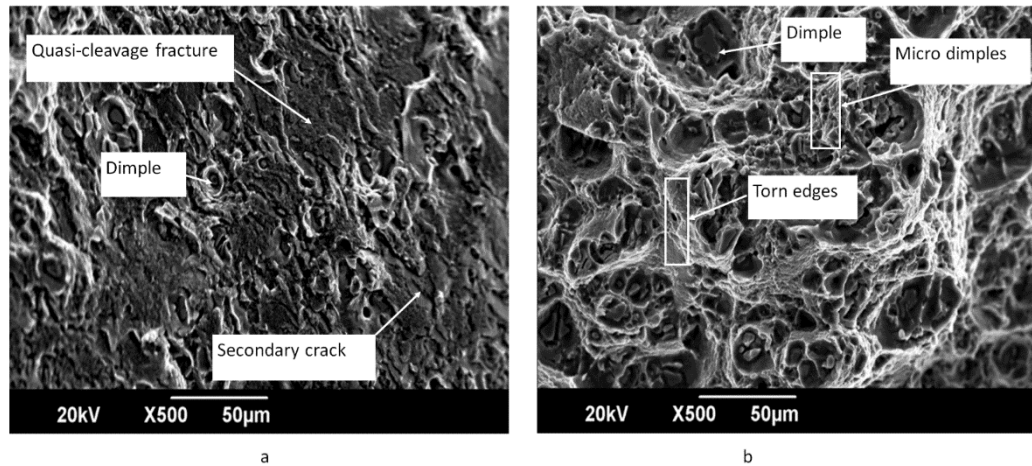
Final fracture surfaces: (a) untreated and (b) treated samples.
